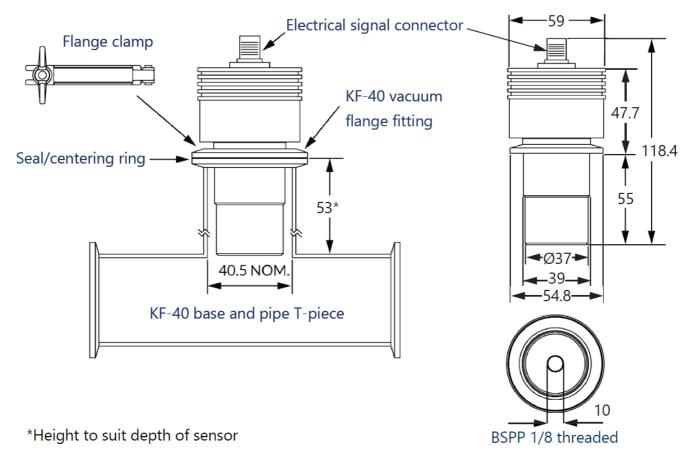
Technical drawing of KF-40 flange and tri-clamp process connections
